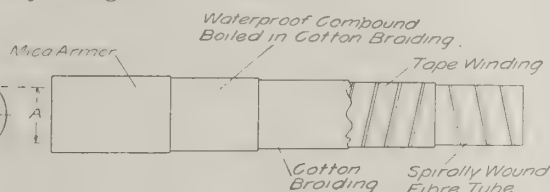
SHOWING CONSTRUCTION OF FLEXIBLE TUBING.
